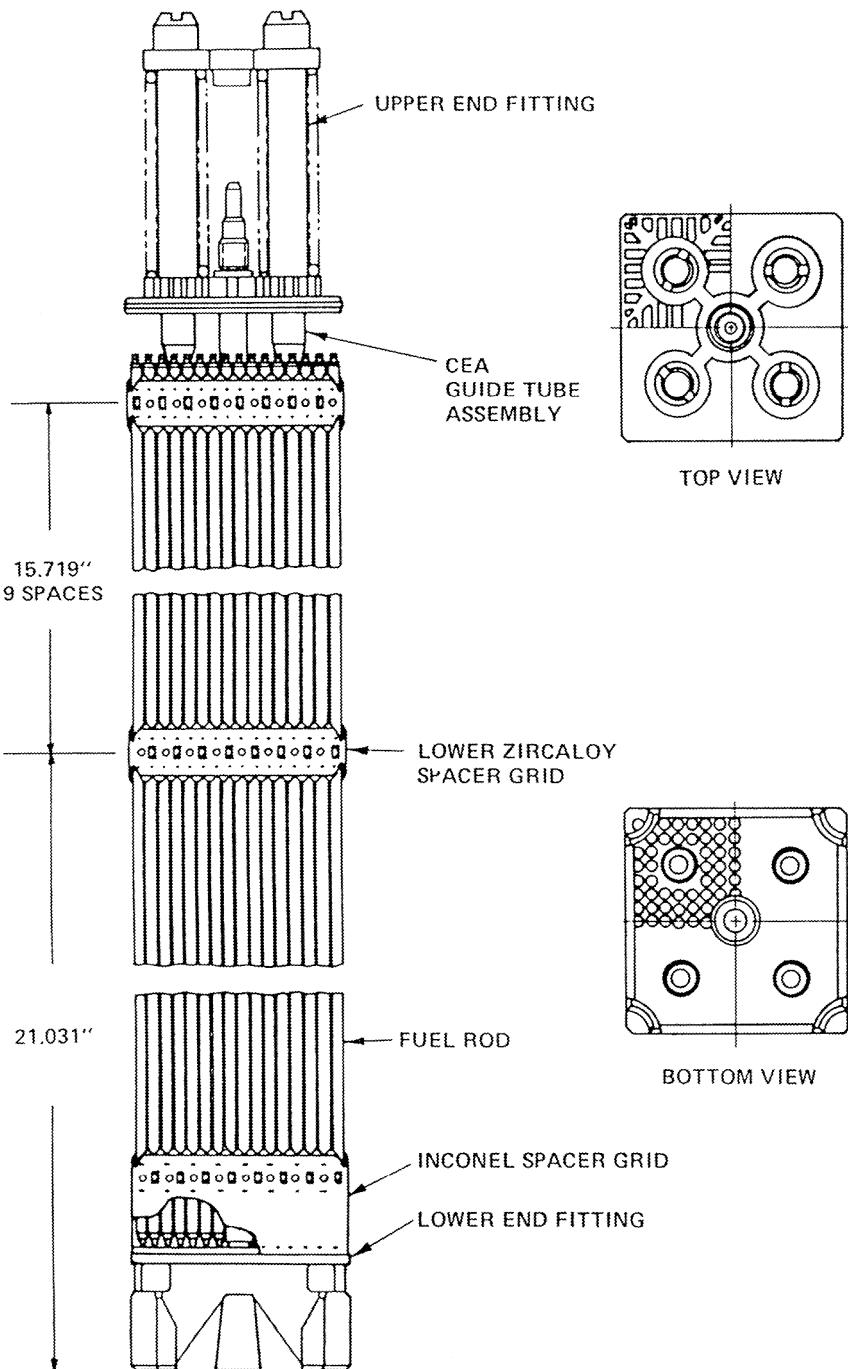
System 80+[®] evolutionary PWR fuel assembly (© 1989 Combustion Engineering, Inc.).
